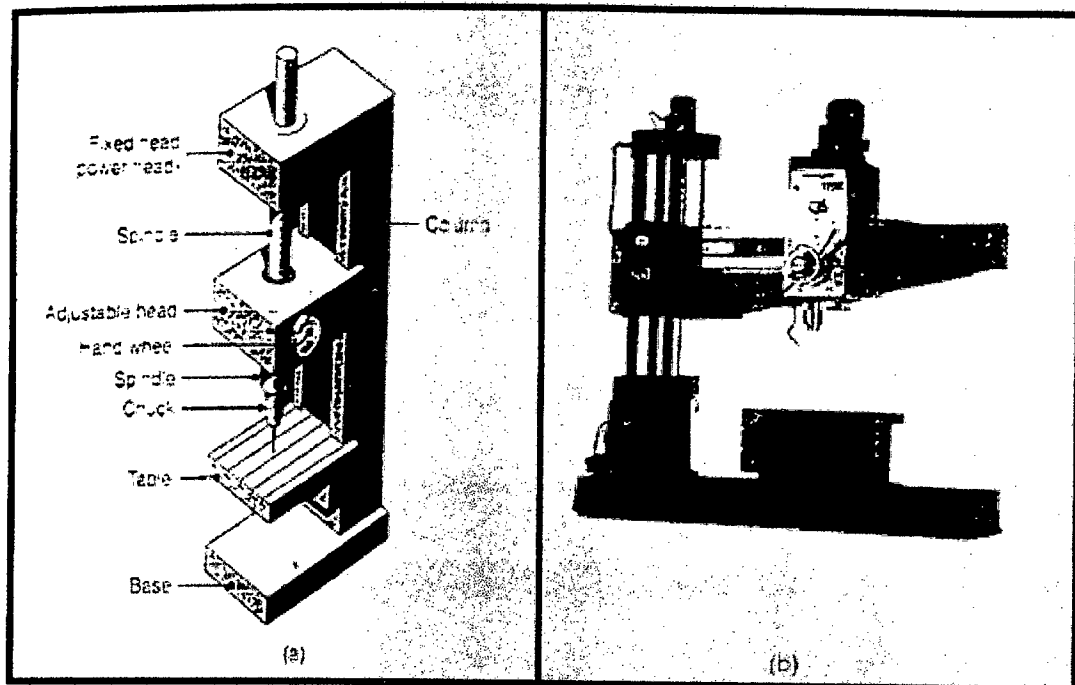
(a) Schematic illustration of the components of a vertical drill press machine. (b) A radial drilling machine.
